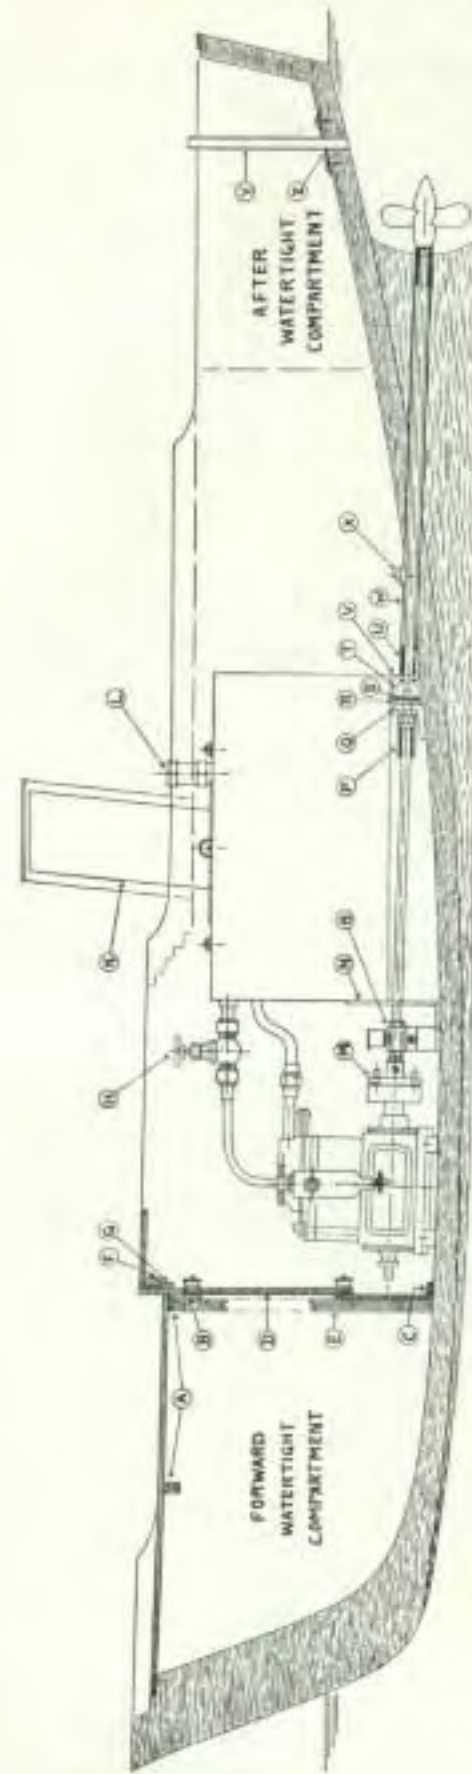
MACHINERY INSTALLATION, WATERTIGHT BULKHEAD CONSTRUCTION, STERN-TUBE AND RUDDER-TUBE
